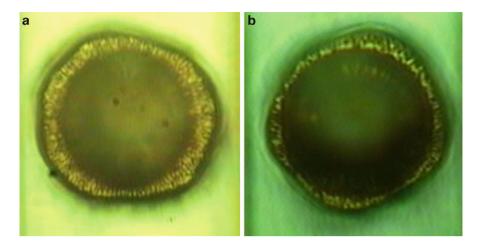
Optical photo of bonded ball shape: (a) Cu wire and (b) insulated Cu wire
